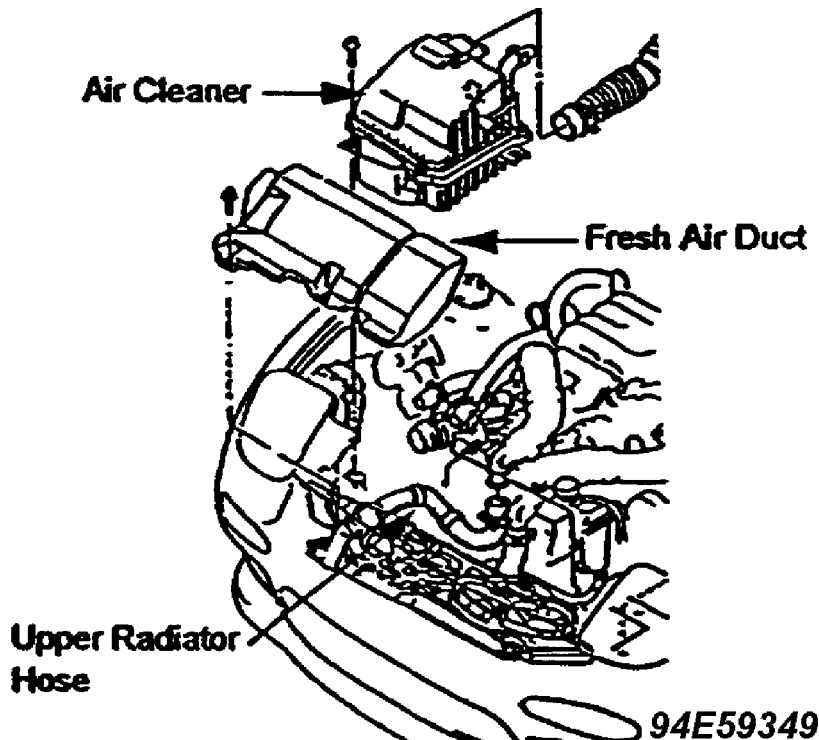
Fresh Air Duct Bolts & Upper Radiator Hose
